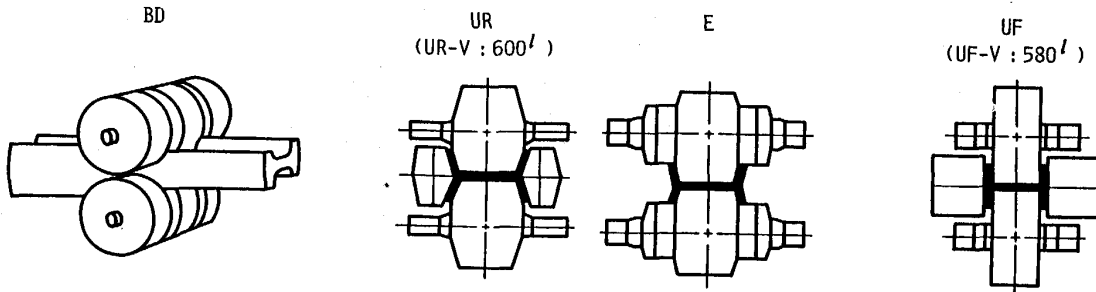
Rolling of Ultra Large Wide Flange Beams
